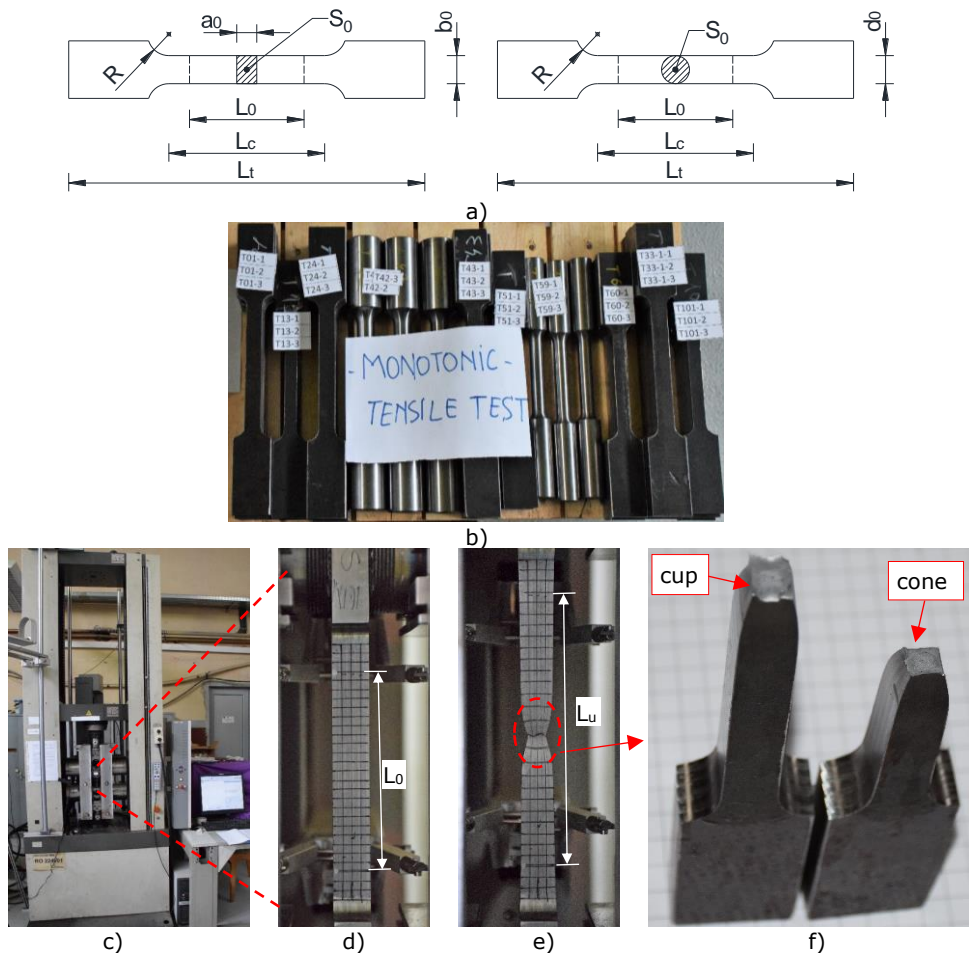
Tensile tests on steel material: a) proportional geometry, b) coupon specimens, c) testing machine, d) initial and e) deformed shape, f) cup-and-cone fracture mode
